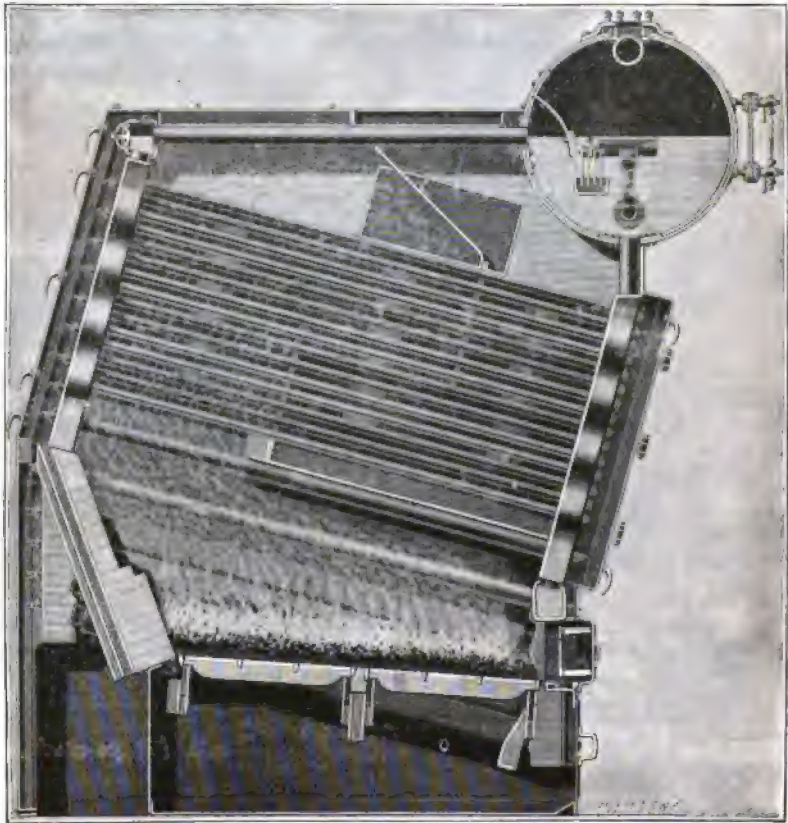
LONGITUDINAL SECTION OF BABCOCK & WILCOX MARINE WATER-TUBE BOILER, "ALERT" TYPE, SHOWING SIDE CASING REMOVED.
